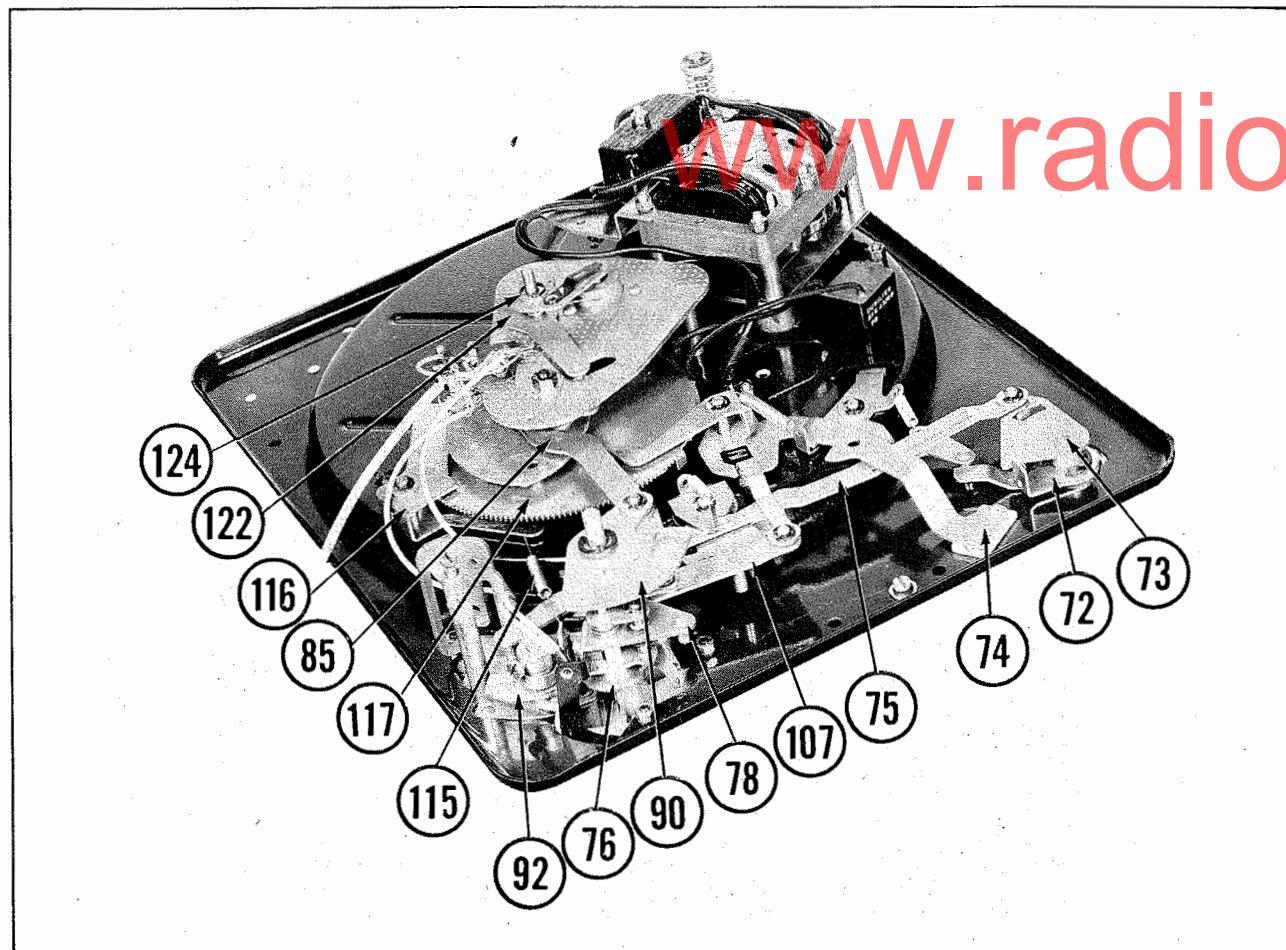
TILTED BOTTOM VIEW OF CHANGER MECHANISM
